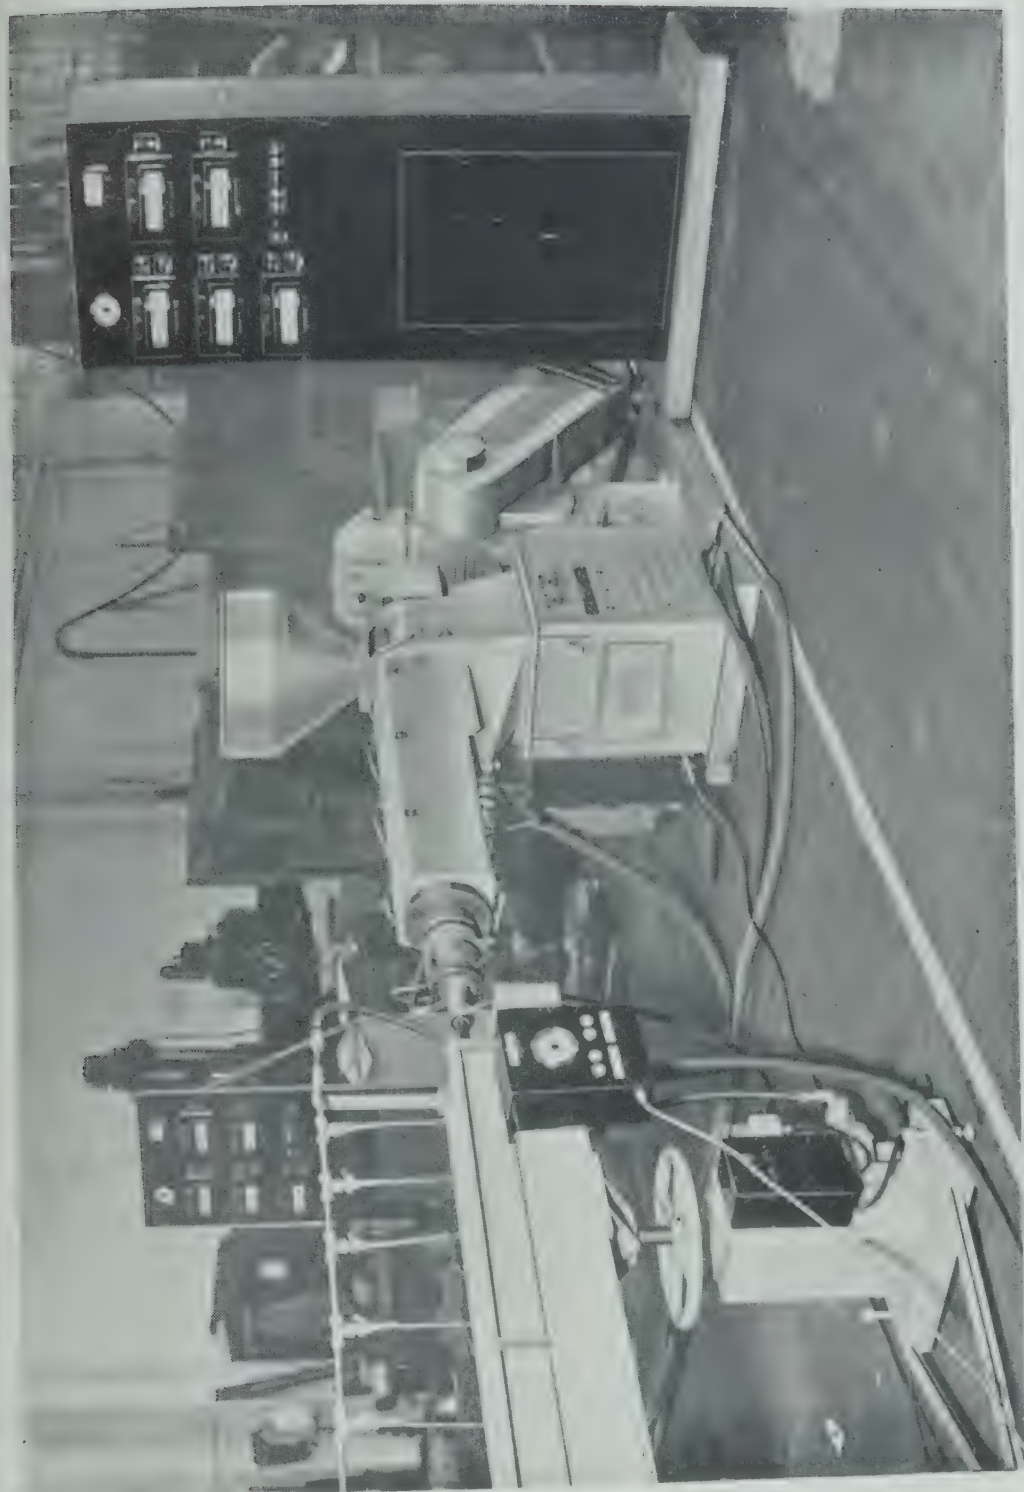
1. Single screw extruder, 2½ in. (Projectile & Engineering Co. Ltd.)
